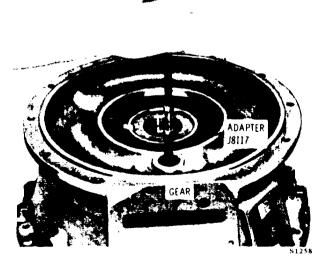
C-21. Removing Oil Pump Idler Gear Shaft
